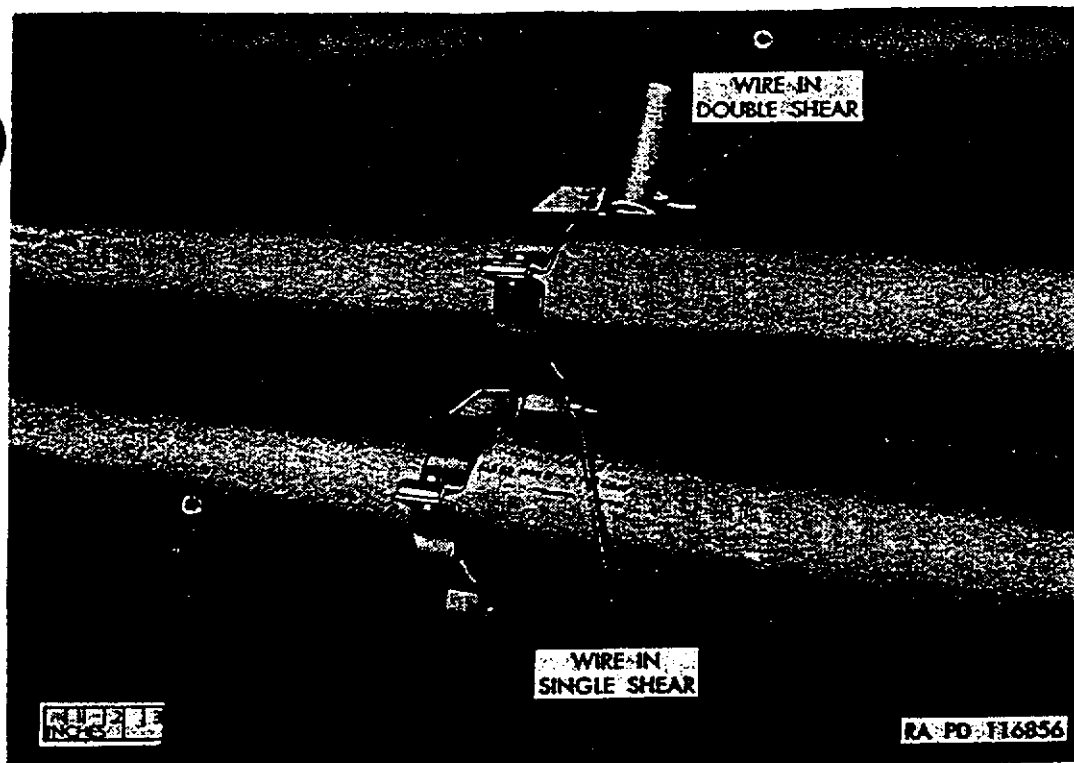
5.0-inch high-velocity aircraft rockets modified by fin assembly kit MS4, with front lug band assembled to front launcher post.
